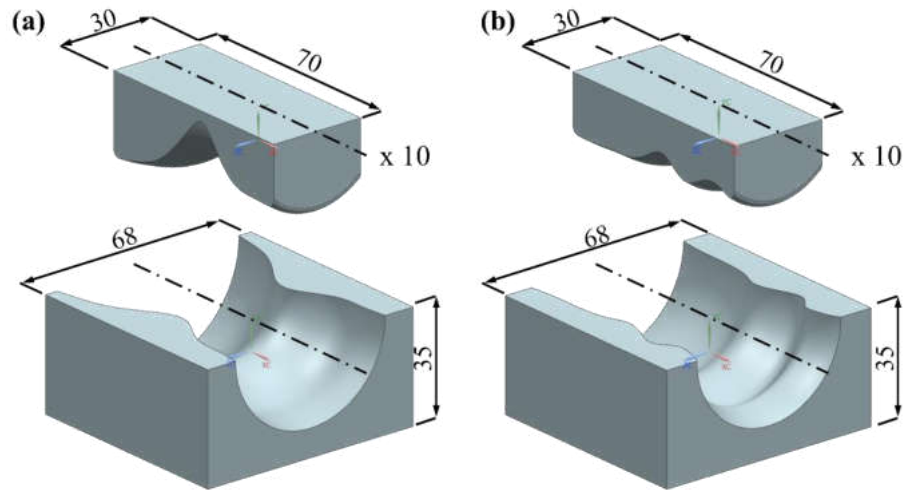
Exploded view of the mechanical joints with the overall dimensions of the parts (a) camel-inspired joint and (b) bison-inspired joint. Dimensions are expressed in mm.
